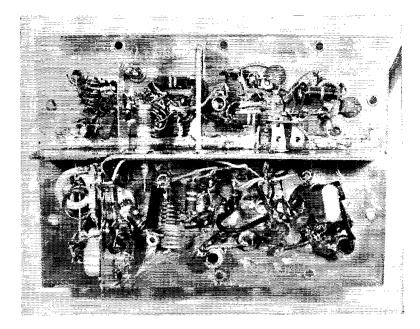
Under-chassis view of the completed transmitting-receiving converter module, showing parts layout and shield partition placement.
